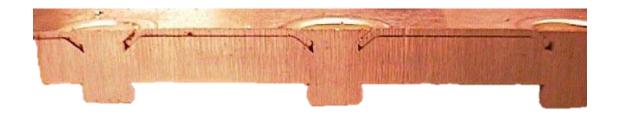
Example of a cut view from riveted joint – In n36sx
